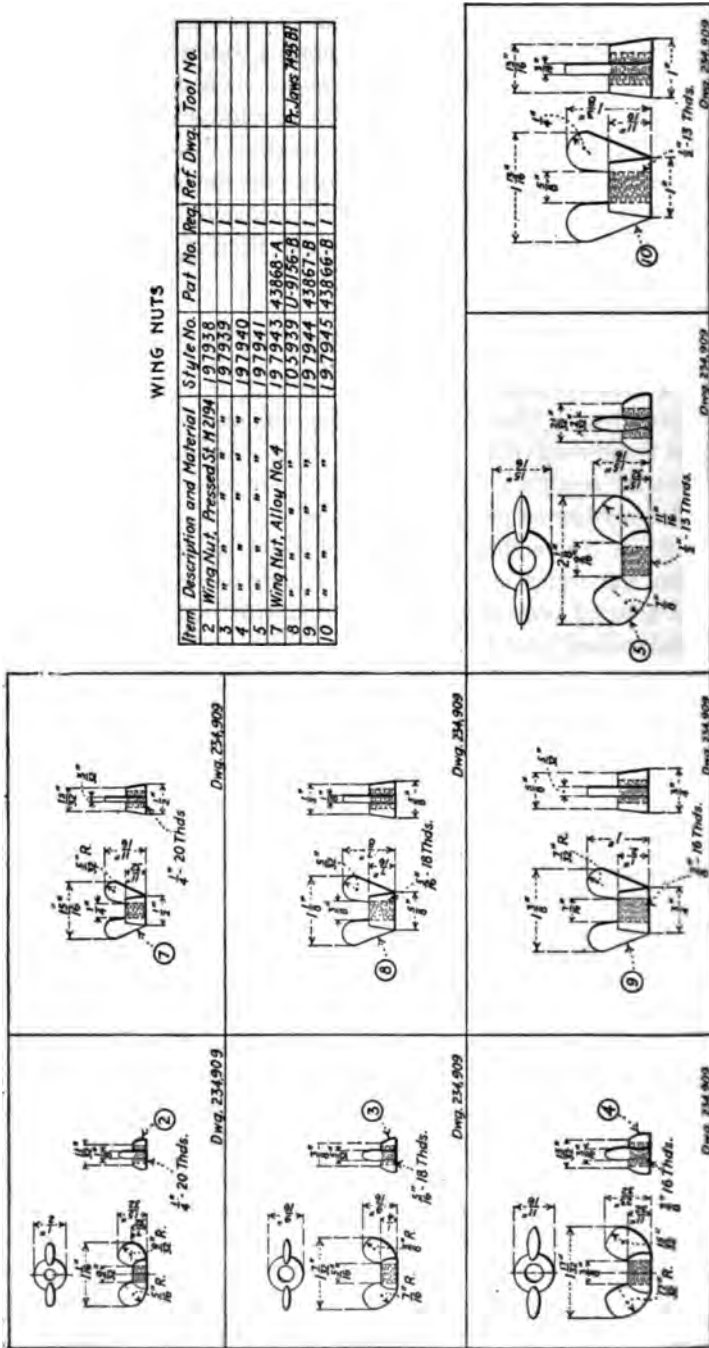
SECTION OF STANDARD DRAWING OF A LAWN OF WING NUTS
